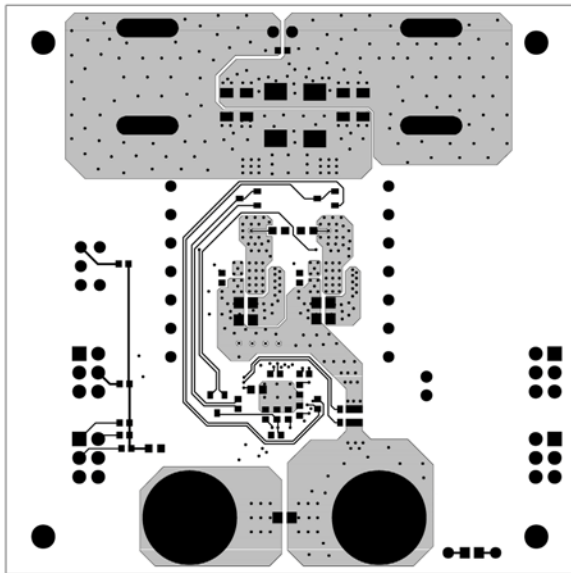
PCB - BOTTOM LAYER (TOP VIEW)
